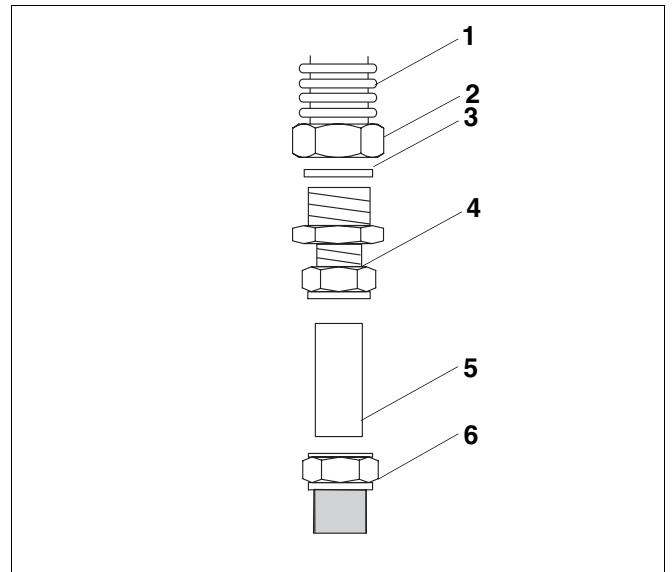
Twin Tube DN 20 connection to 22 mm compression fitting
